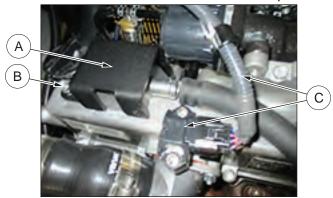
Correct Position of Sensor Housing, Cable, and Bracket
